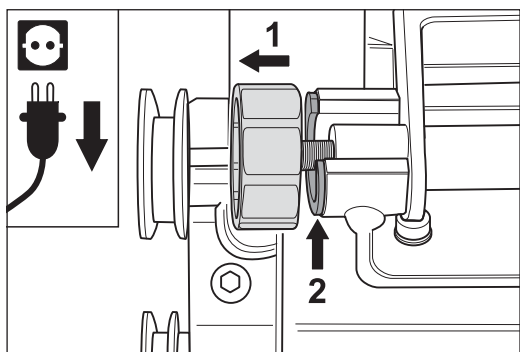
until the two nuts used to fit into the motor bearing bracket are exposed.
